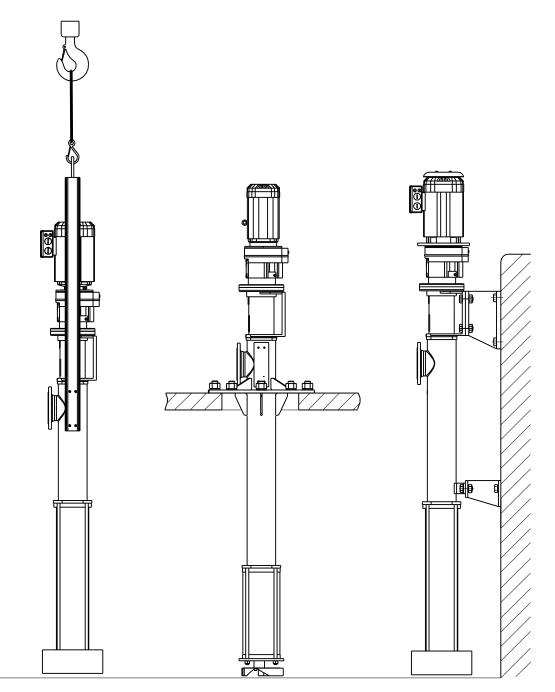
KLT with hanging bracketFig. 4.2 KLT with mounting flange4.3 KLT fixed to bearing chair and bracketThe adjacent figure shows attachments for different forms of the KLT pump.
